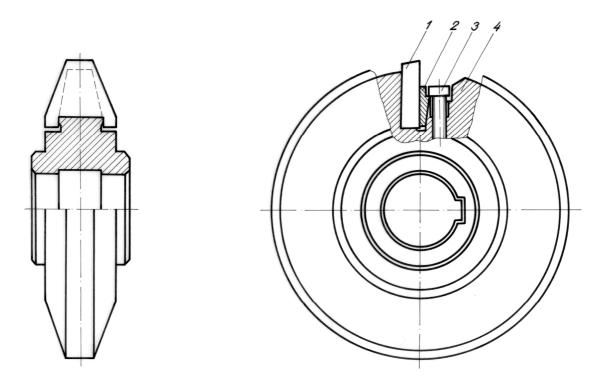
Structure of a prefabricated disk cutter: 1 - cutting tooth; 2 - pressing cotter; 3 - screw; 4 - body.
